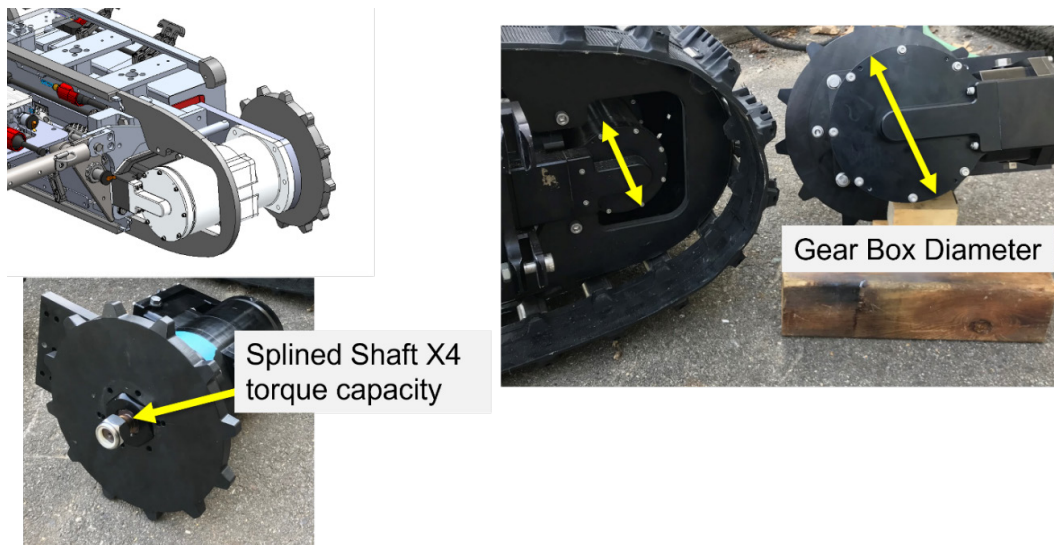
Heavier Torque Motors Were Larger, Required Support Sturcture Material Changes and More Efficient Shaft Designs.
